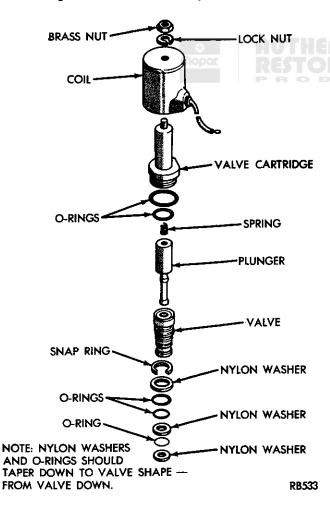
Solenoid Valve "C"/Four-Way Valve—Exploded View
